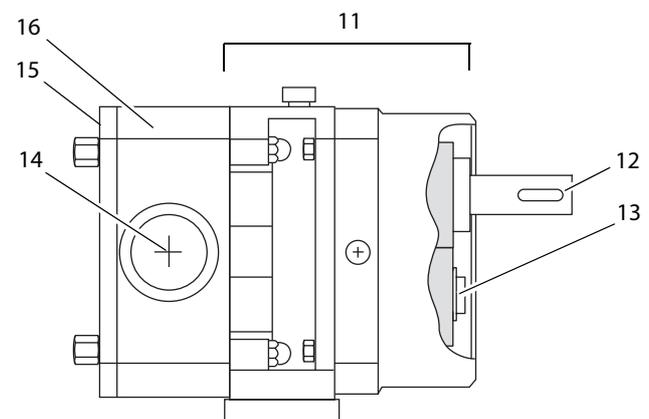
Principles of design illustrated using the FL positive displacement pump
